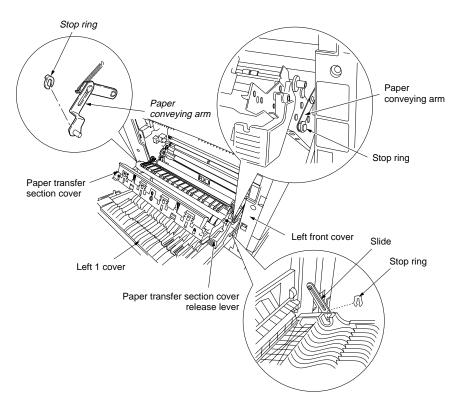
Replacing the left feed cleaner assembly and left registration cleaner assembly (1)
